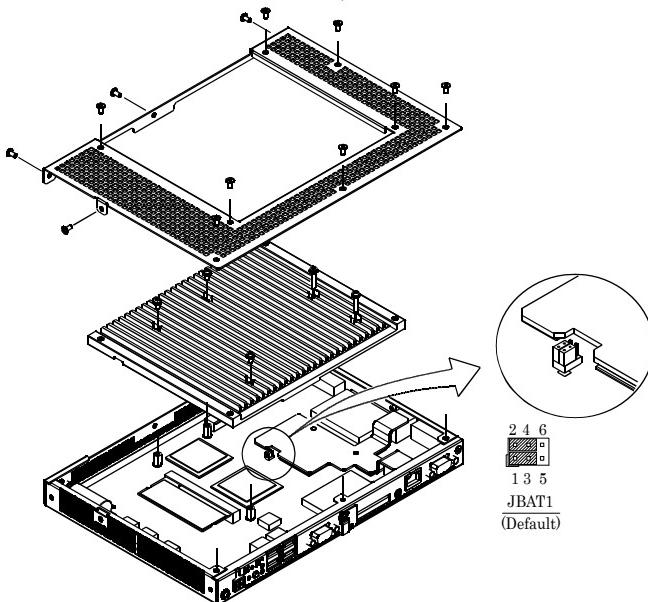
Removal of Cover and Heat Sink and Locations of CMOS/ROM Clear Jumpers
